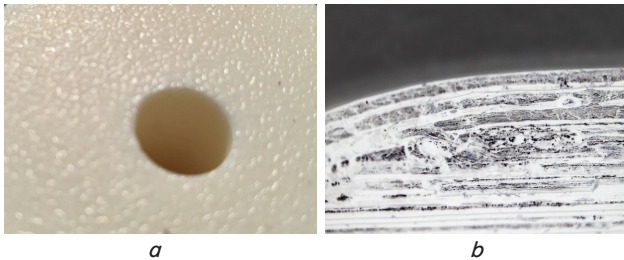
Photograph of the end face of the workpiece: a – before mechanical cutting; b – microphotograph of part of the cut surface
